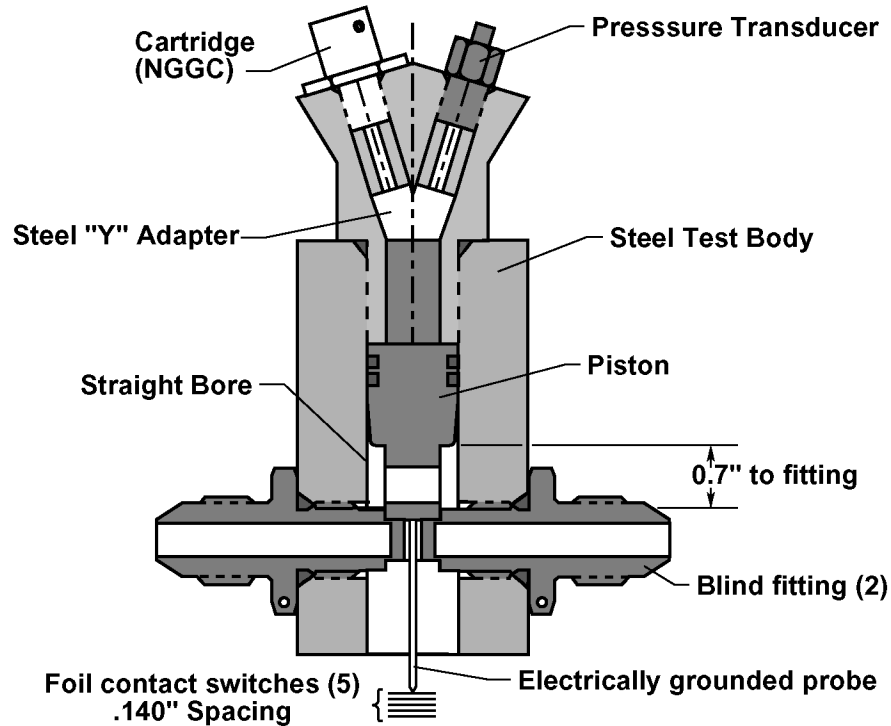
Cross sectional view of steel test pyrovalve used to measure the velocity of the piston in opening the valve.
